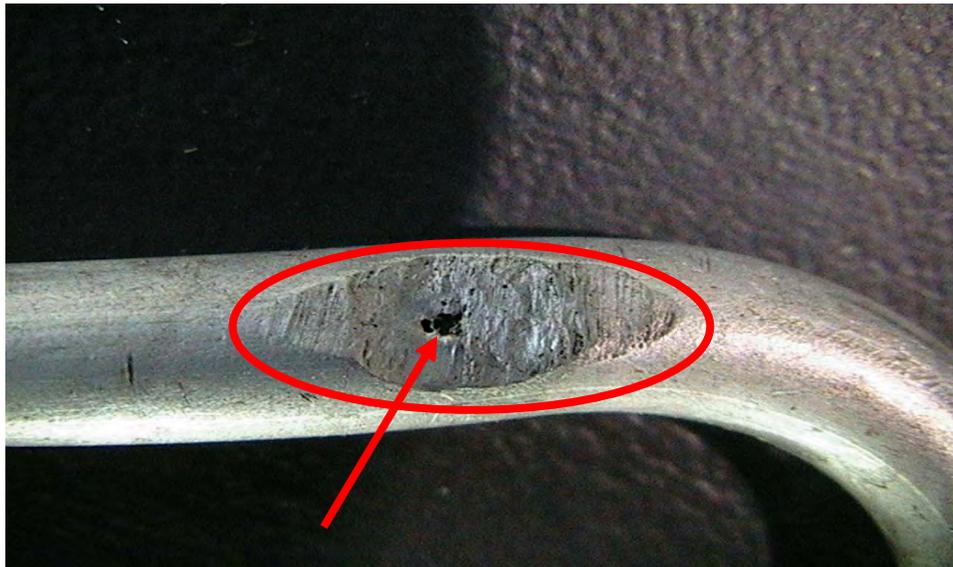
Close-Up View of Hole in the Left Wing Manifold Pressure Line
